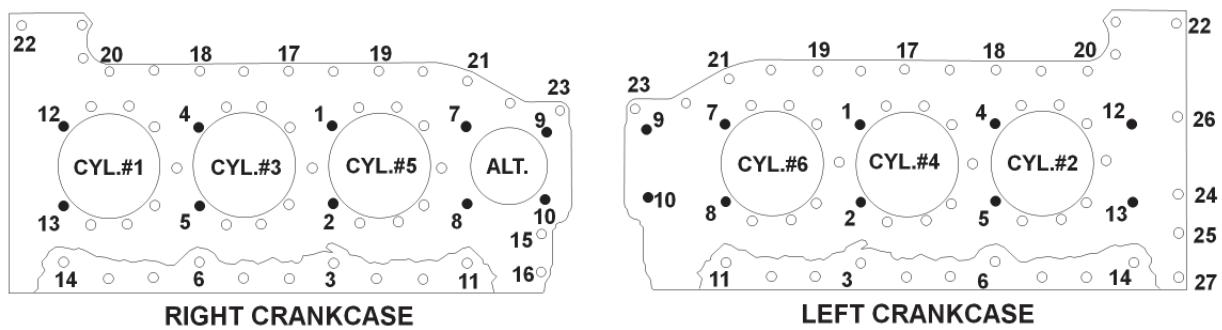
Crankcase Dimensional Inspection Torque Sequence
